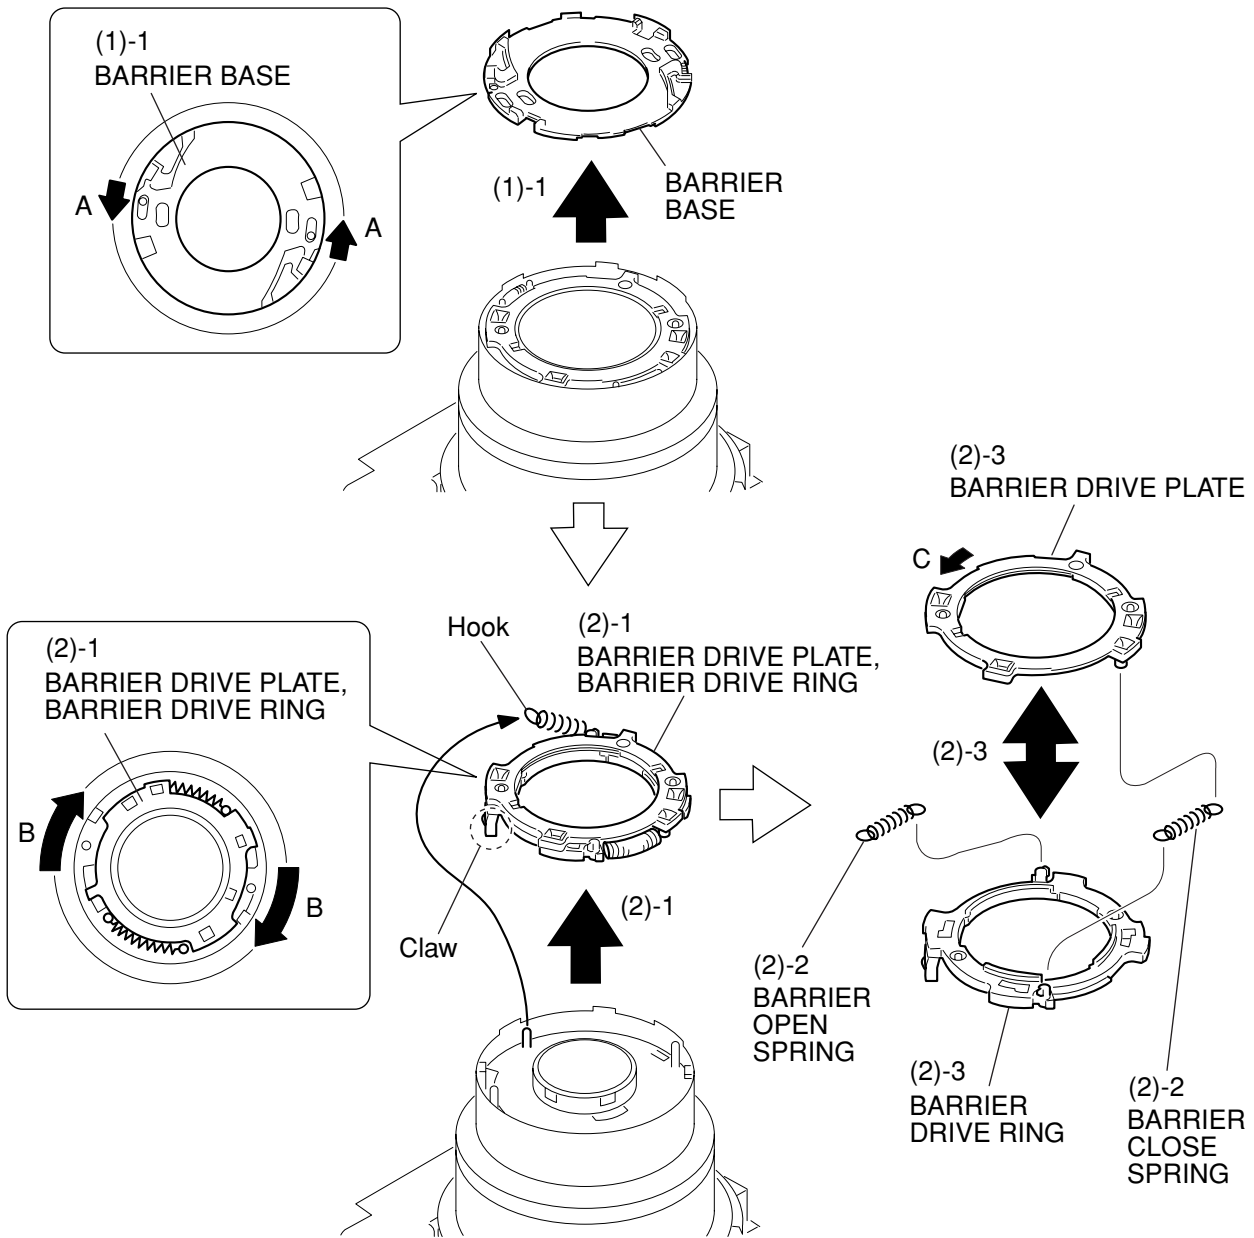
BARRIER BASE, BARREL DRIVE PLATE, BARRIER DRIVE RING
